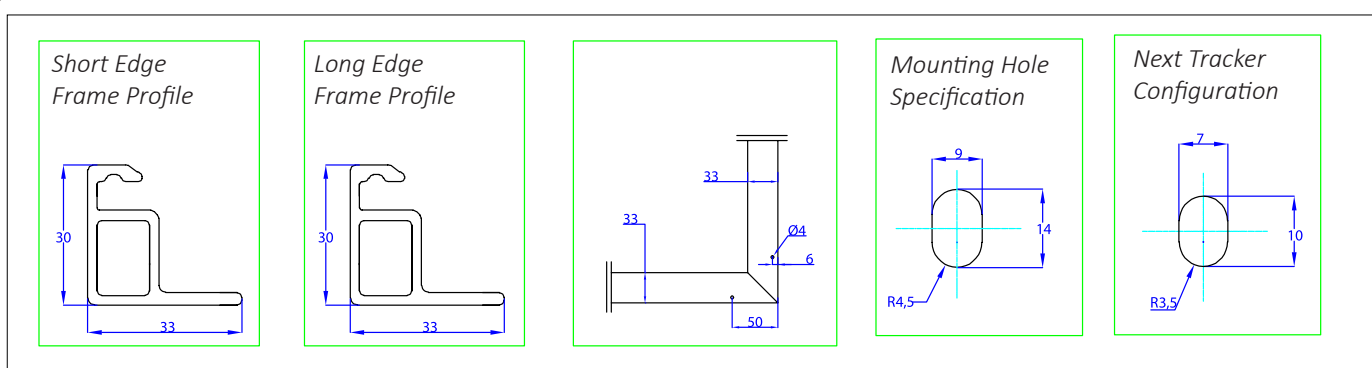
Aluminum (Glass-Backsheet) 2382/1134
